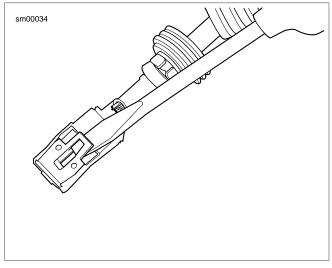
Delphi 800 Metri-Pack Sealed Main Fuse Housing: Bend Tang
